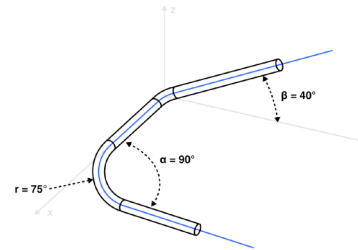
Bending radius (r), bending angle (α) and bending direction (β) for a tube with a diameter of $\varnothing 25$ mm
